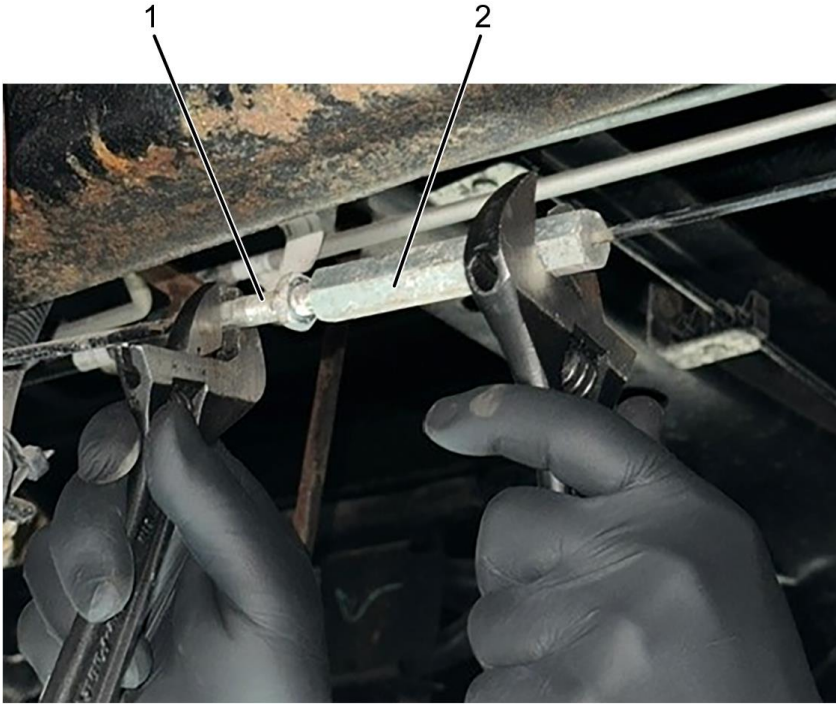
Rear Parking Brake Cable – Turnbuckle
